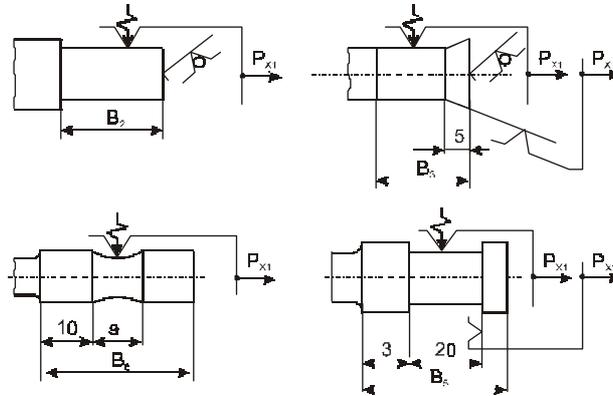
Example schematics of alignment of shaft end in machining with application of tensile force. Dimension B depends on the diameter of the shaft
